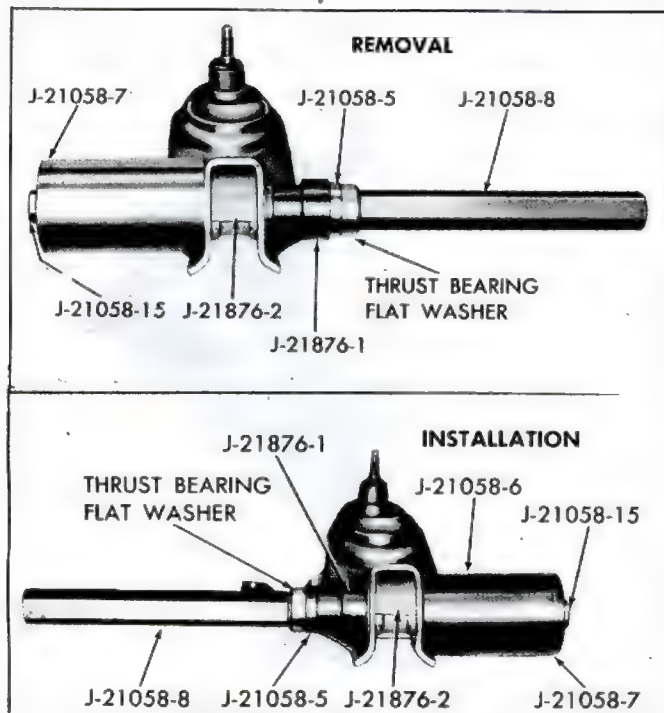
Removing and Installing Lower Control Arm Bushings
